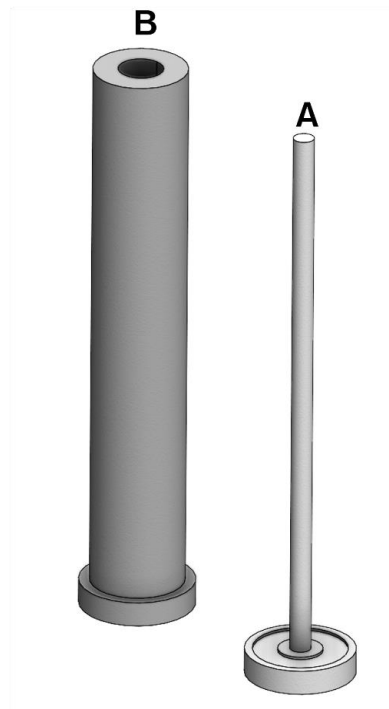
Additively manufactured tooling components to produce isopressing mold bags. (A) Mold mast produced using WaterShed XC 11122 and SLA 3D printing. (B) Mold jacket produced using WaterShed XC 11122 and SLA 3D printing
